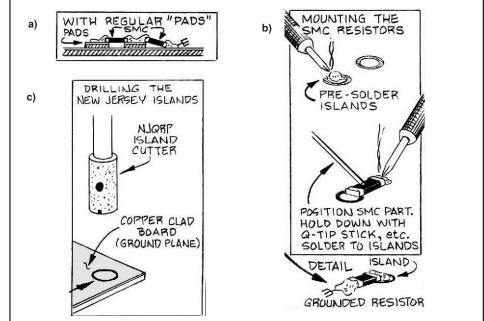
These three diagrams illustrate ways of attaching SMT components to a copperclad base board. (a) Using regular glue-on pads; (b) Using island "cuts" in the copper ground plane; and (c) Making the island cuts with an end mill. [Illustrations provided by Paul Harden, NA5N.]
